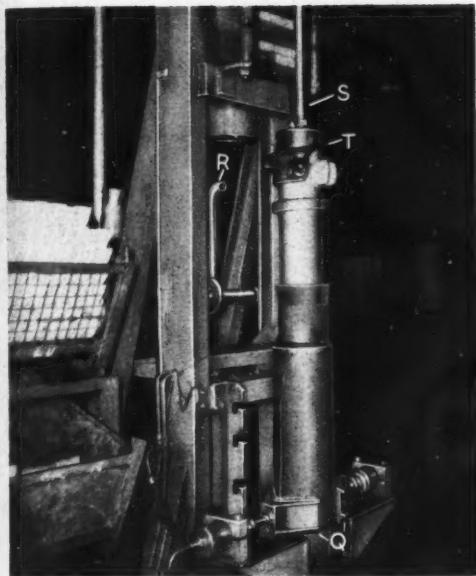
In this hydraulic rig, the outer tube sub-assemblies are filled with hydraulic fluid
